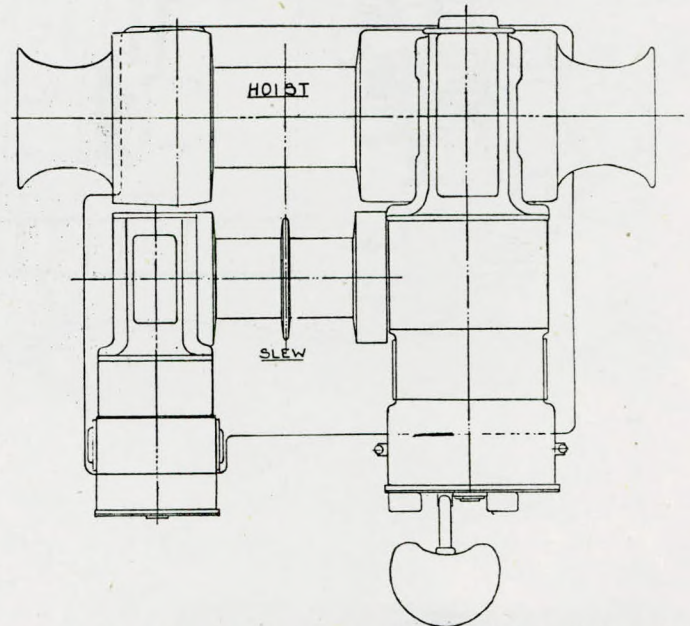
Arrangement of worm geared electric hoist and slew winch.
